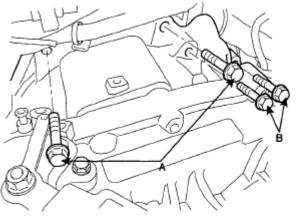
Identifying Special Tools (09200-38001) And Engine Support Fixture On Engine Assembly
